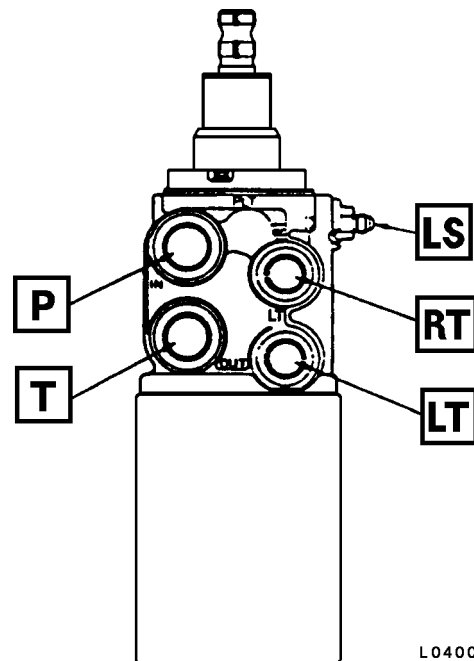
STEERING CONTROL VALVE ASSEMBLY
